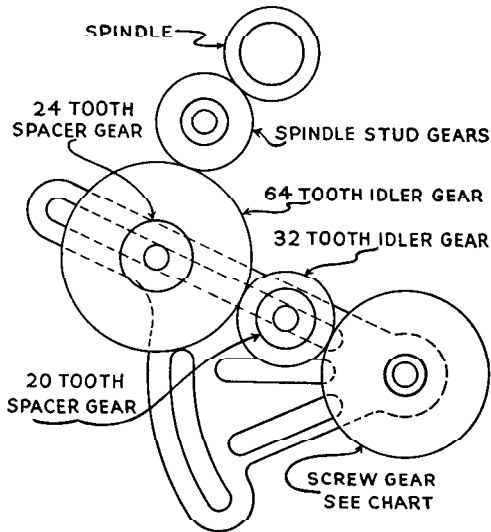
Gear set-up for 8 through 16 threads per inch.
